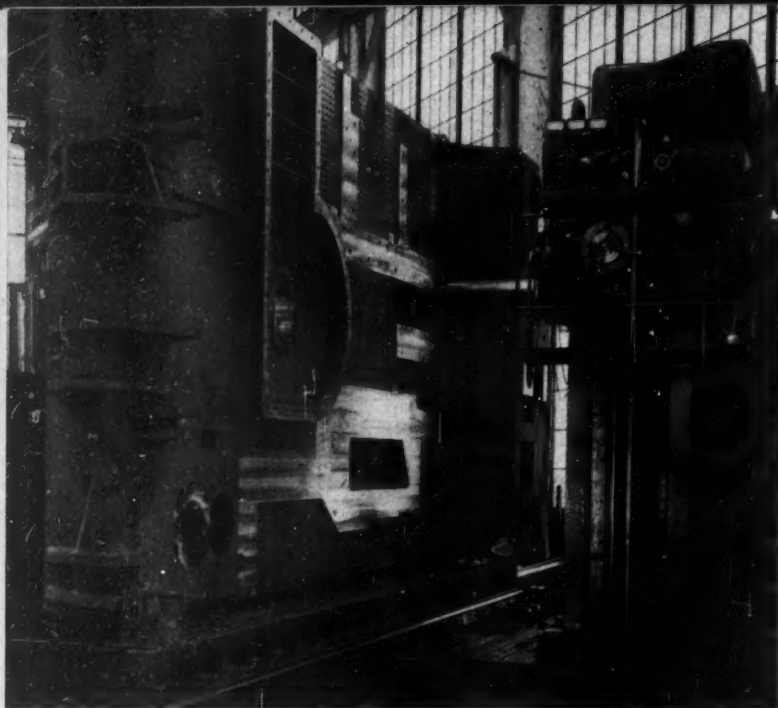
Boring and face milling a large locomotive crane base weldment on a planer type machine
